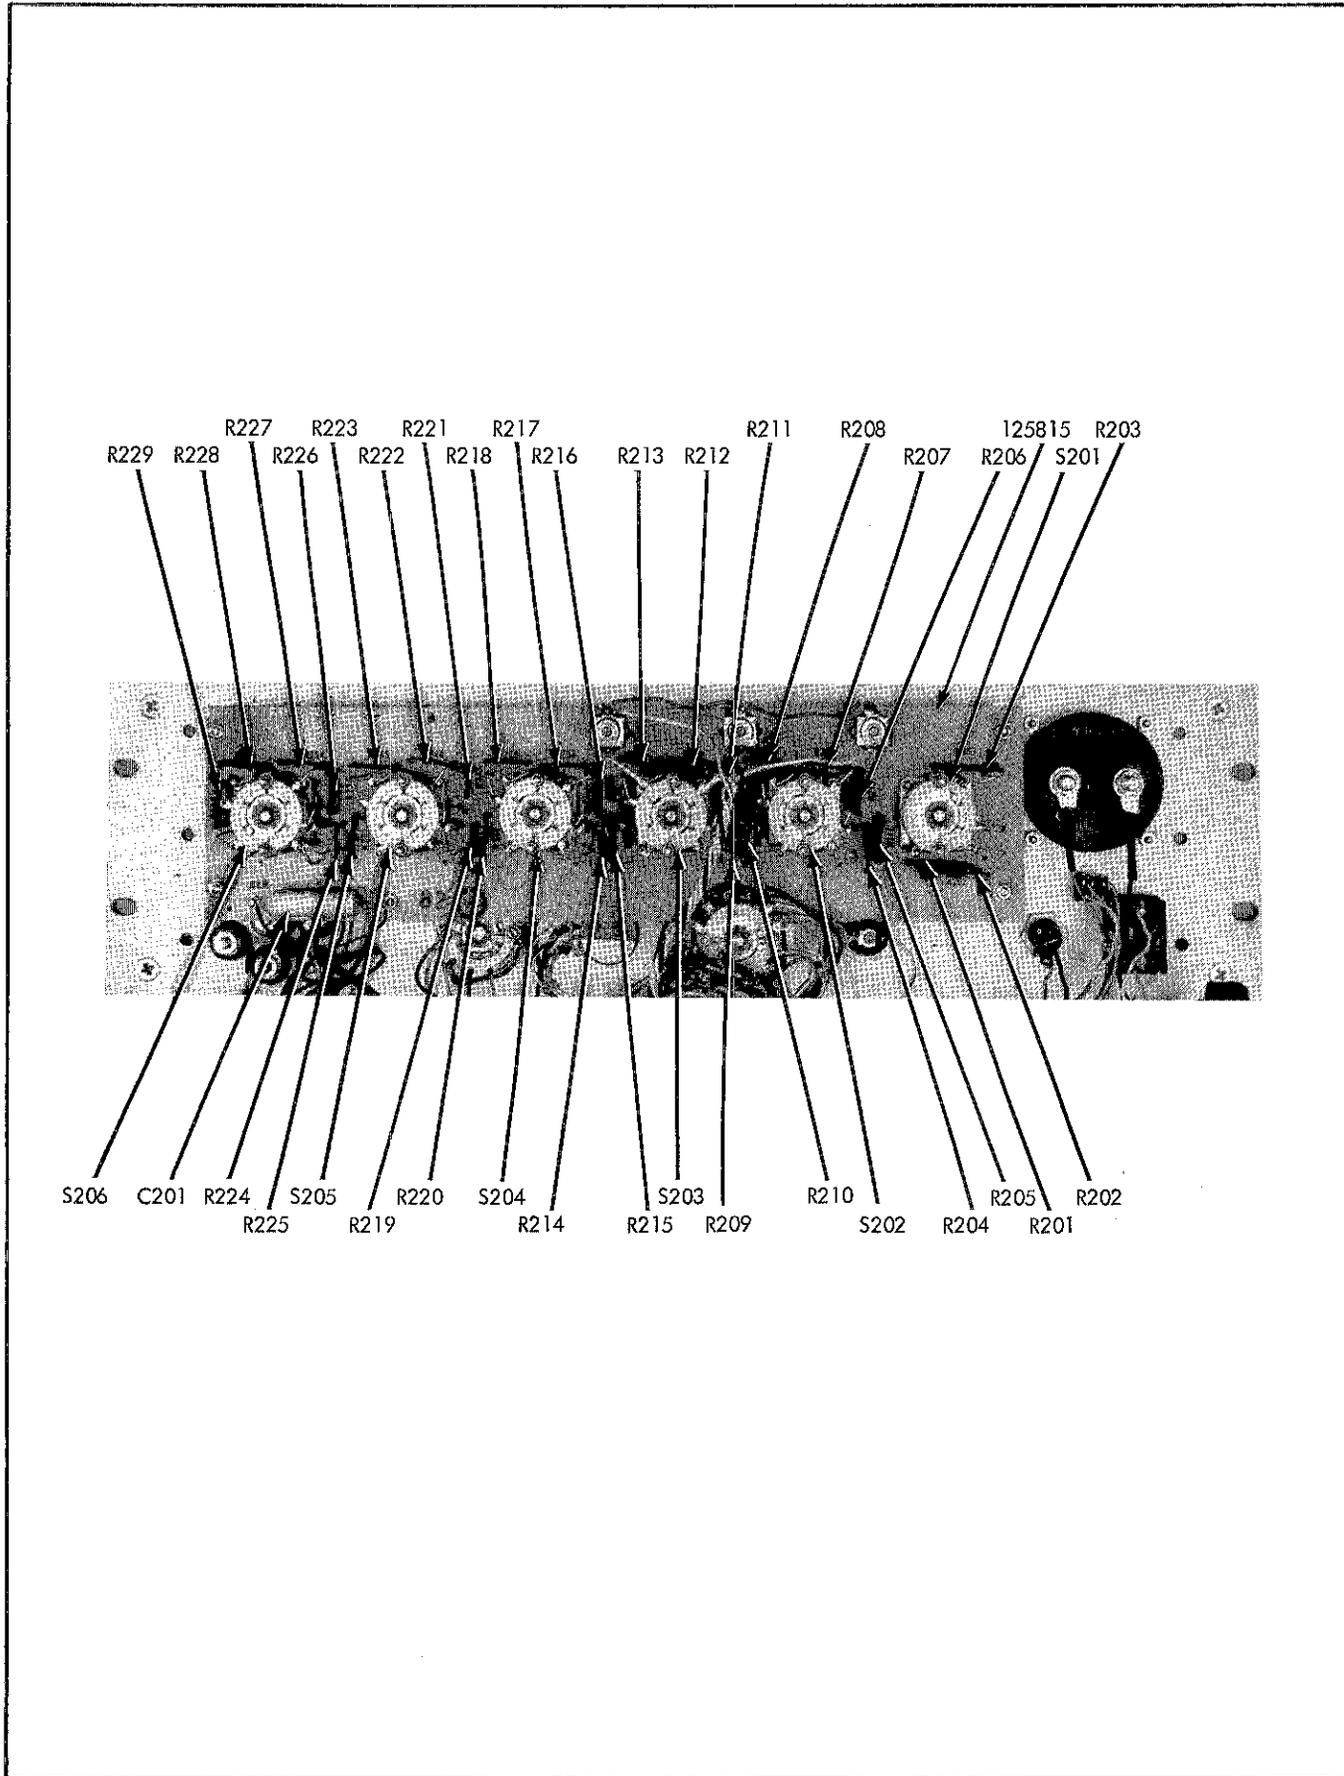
FRONT PANEL ASSEMBLY (sheet 2 of 2)
